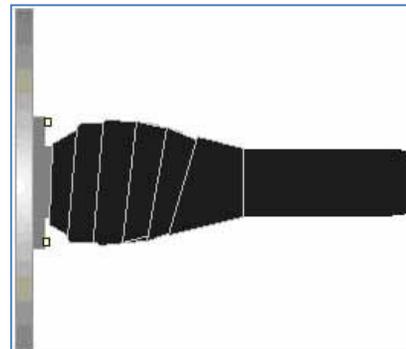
Step 3. Covering Rubber Tape with Electrical Tape
